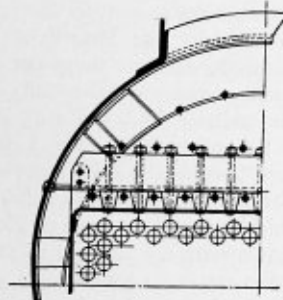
Section Through Crown Bar Boiler, Showing Cross Braces
